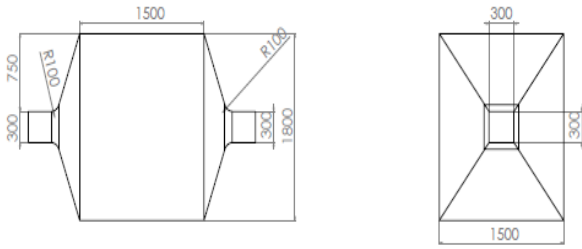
HPHE dimensions (in mm) with fillet near ends
